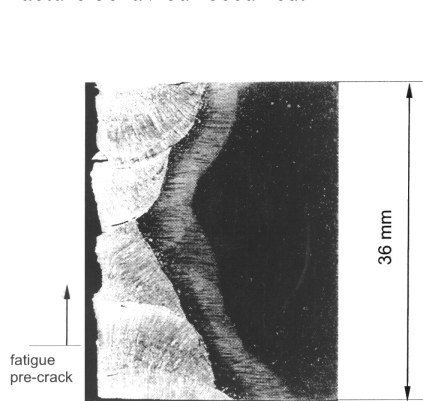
Macro-etched photograph of specimen BxB-as-3, with surface notch tip in the weld metal
